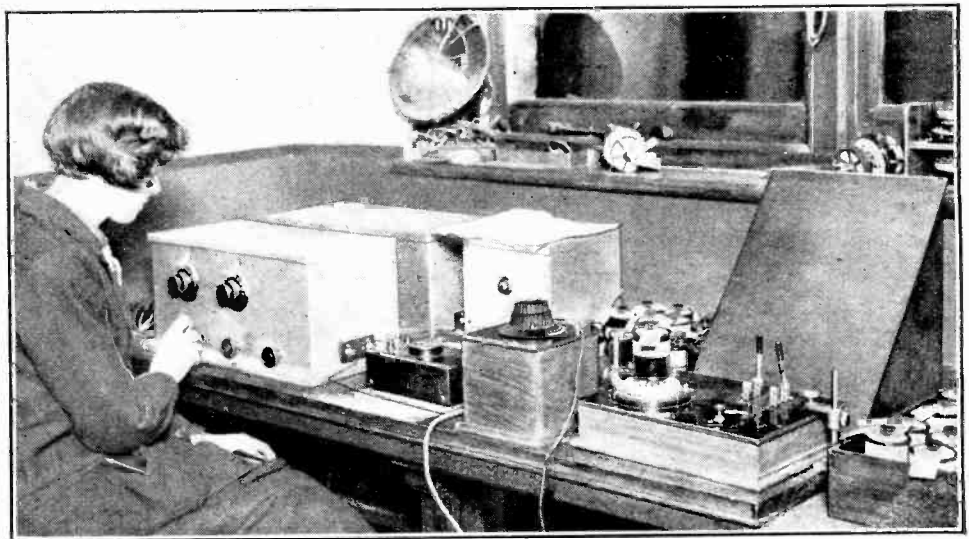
Corner of a coil-testing room. To ensure uniformity in inductance, sense of winding and insulation resistance the valve voltmeter is extensively employed.
